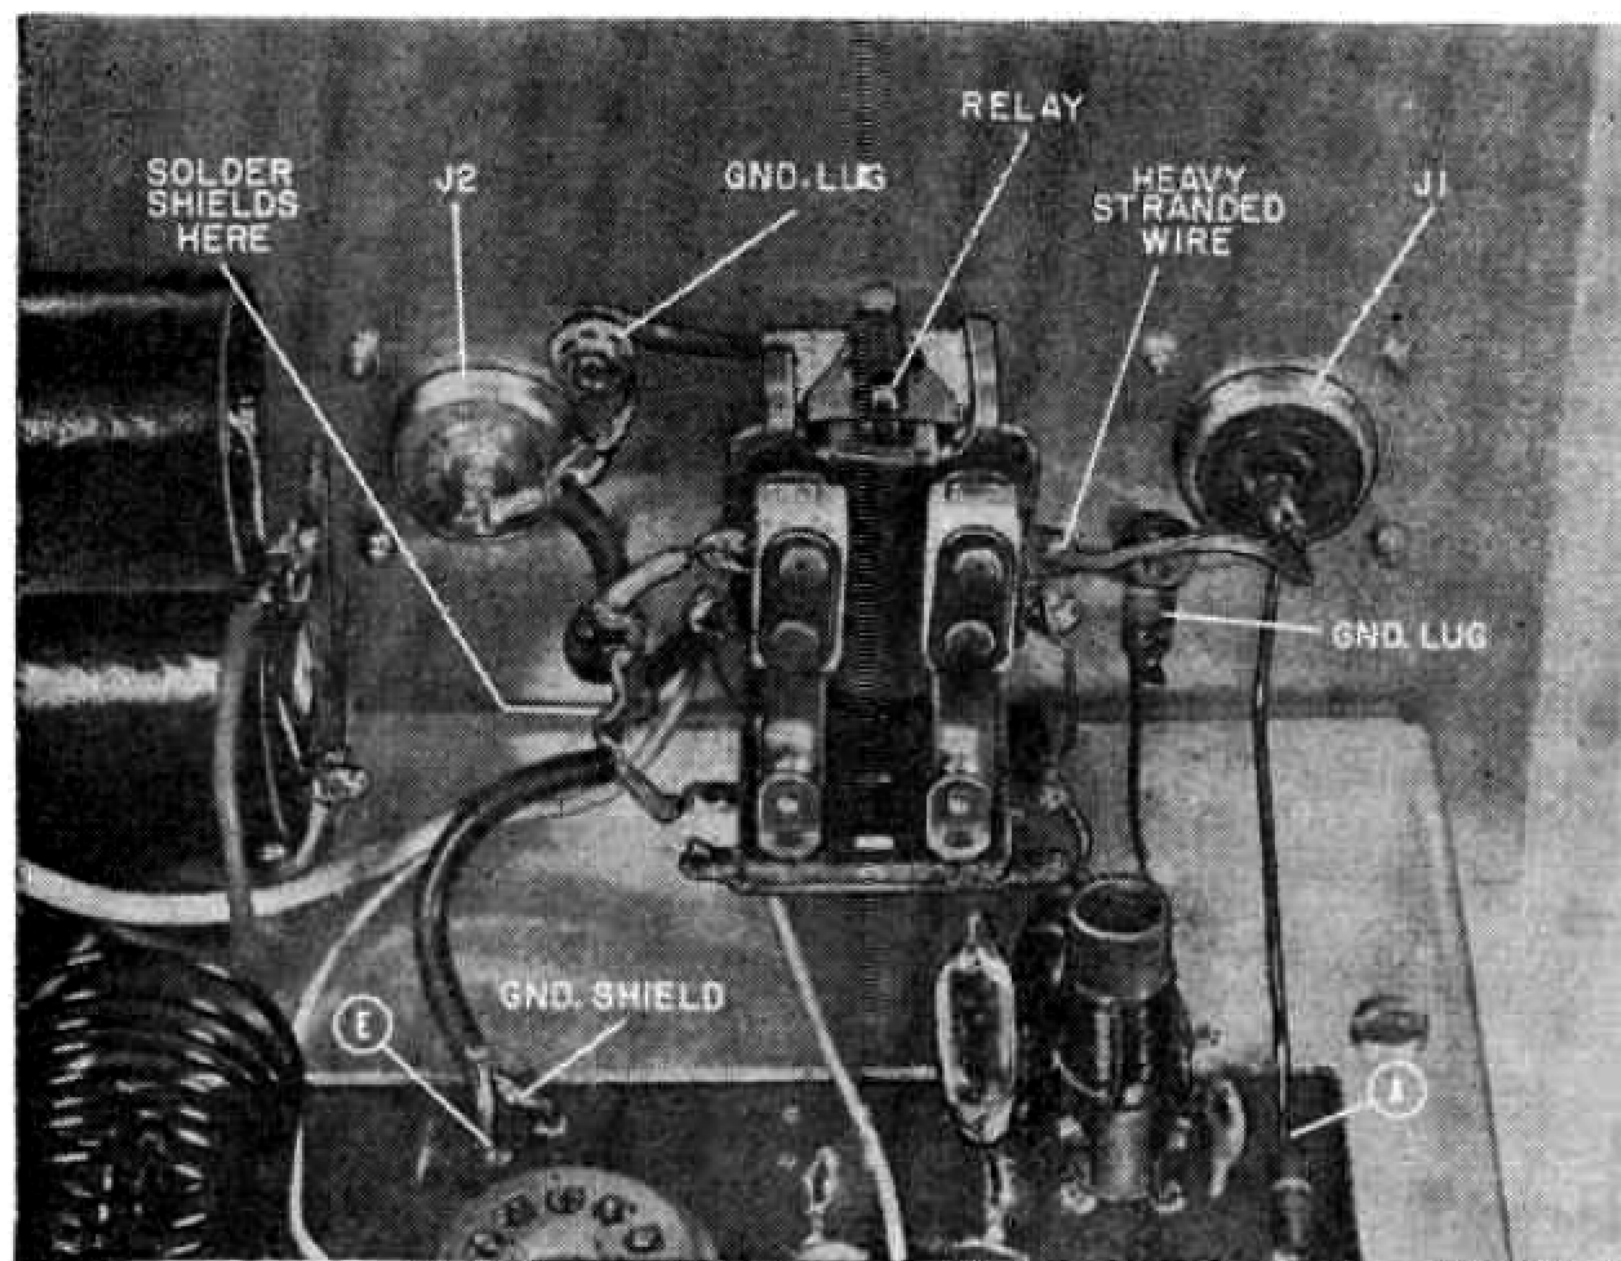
Be sure to use heavy stranded wire from J1 to indicated relay terminal, and solder the cable shields together to insure common ground throughout.
